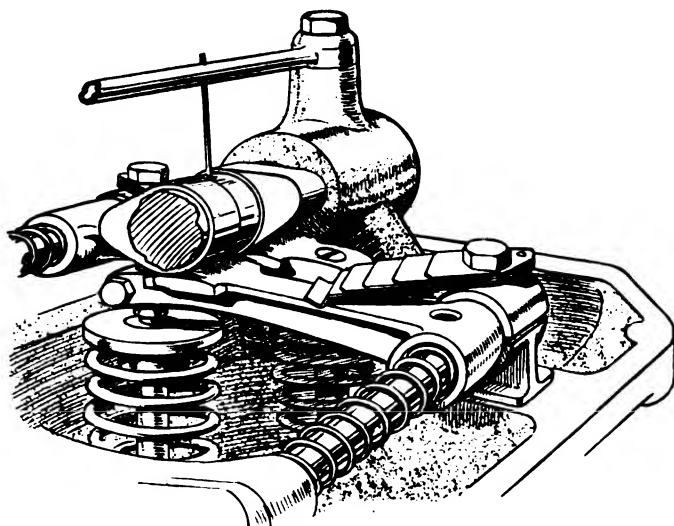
THE BEARDMORE ENGINE THAT EMPLOYS PIVOTED LEVERS WITH AN OFFSET CAMSHAFT TO OPERATE THE VALVES
